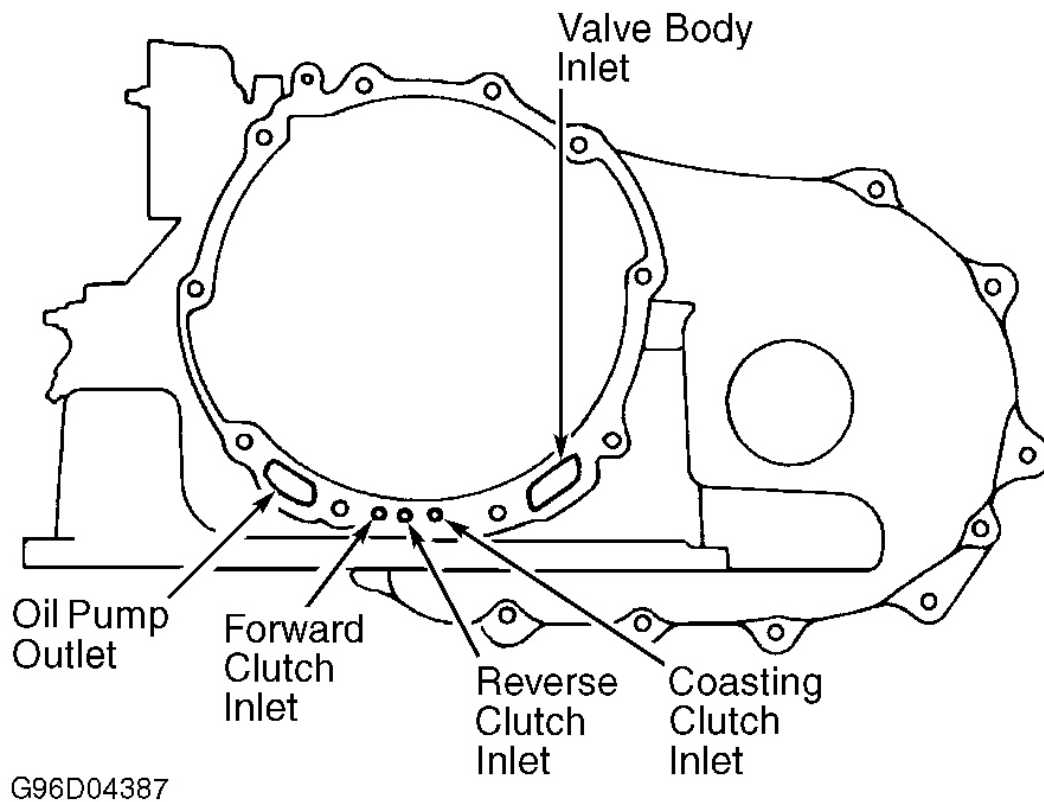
Identifying Oil Passages Transaxle Case-To-Oil Pump
